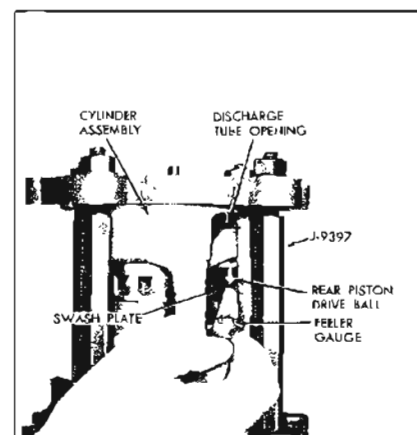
Checking Clearance Between Rear Piston Drive Ball and Swashplate
